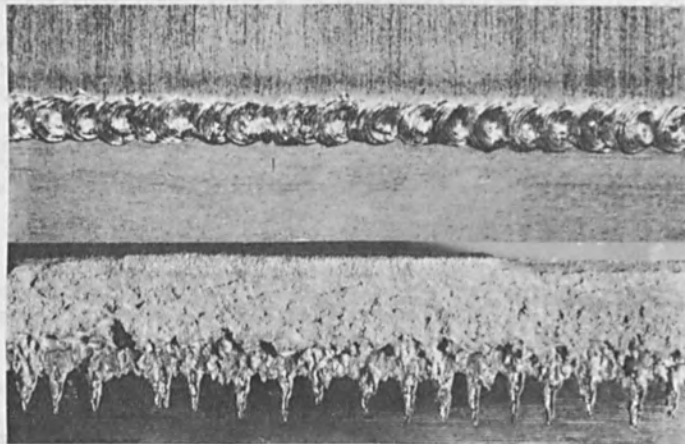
Surface and Fracture Appearance of an Electron Beam Weld in Aluminum Alloy Type 6061. Welded at 90 Kv, 20 ma, 10 ipm.
